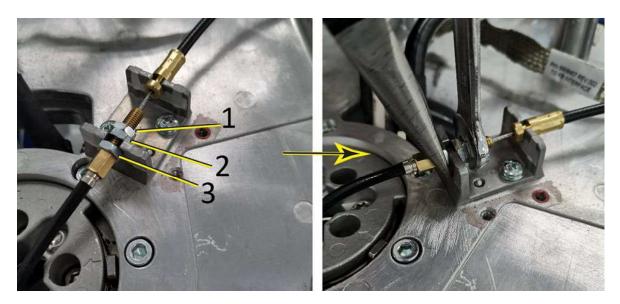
Losen nut 1 and nut 2 in sequence to pull the cable out
